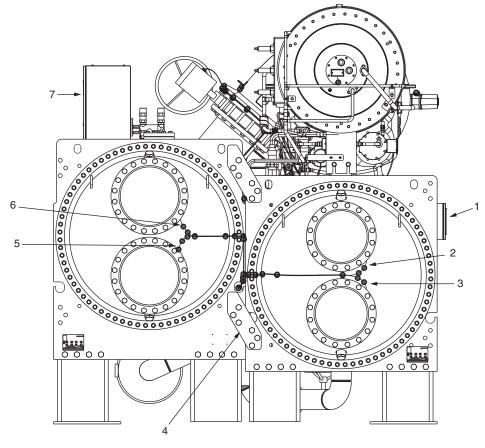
Chiller Top View (Compressor Frame Size 6 Shown), 19XR6/7
